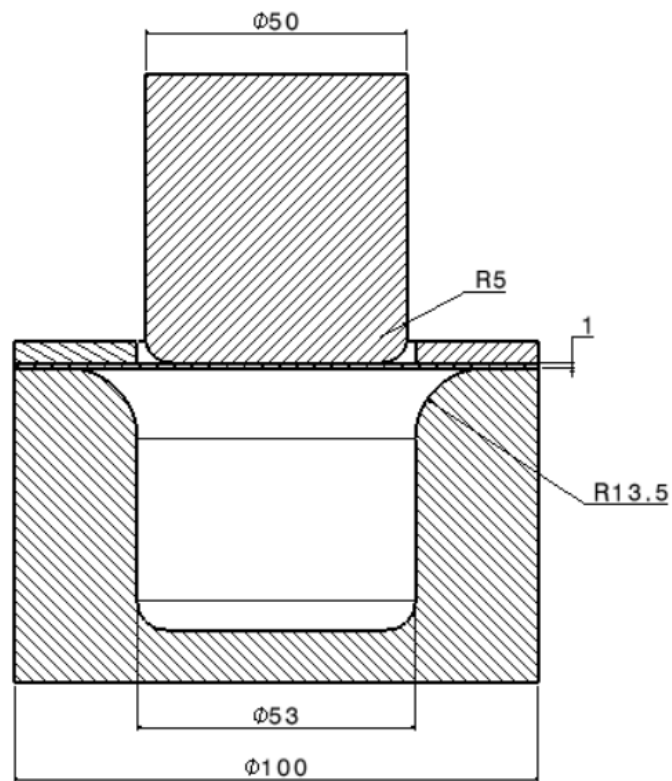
Deep drawing punch, die, blank holder and blank geometry (dimensions in mm)
